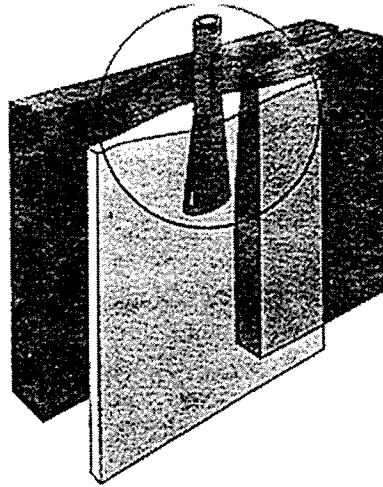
Funnel-shaped mold with submerged casting nozzle (3).
